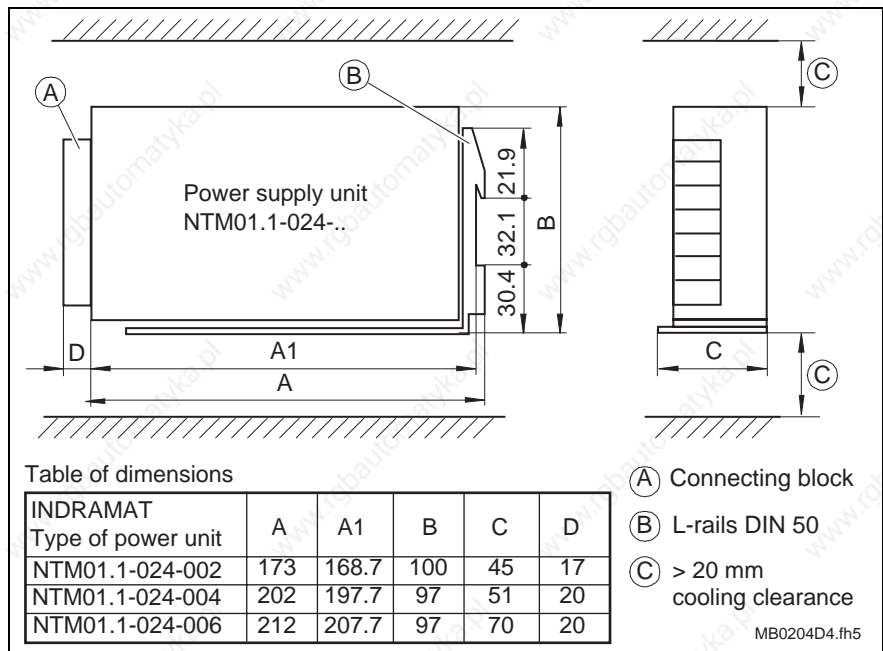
Dimensional sheet DC +24V NTM power supplies
